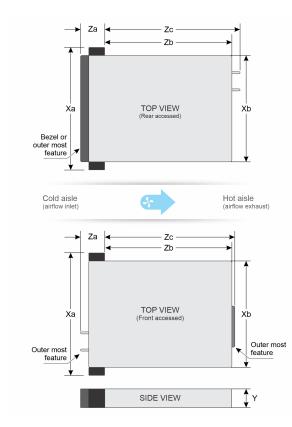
XR5610 Chassis dimensions for rear accessed (top) and front accessed (bottom)
